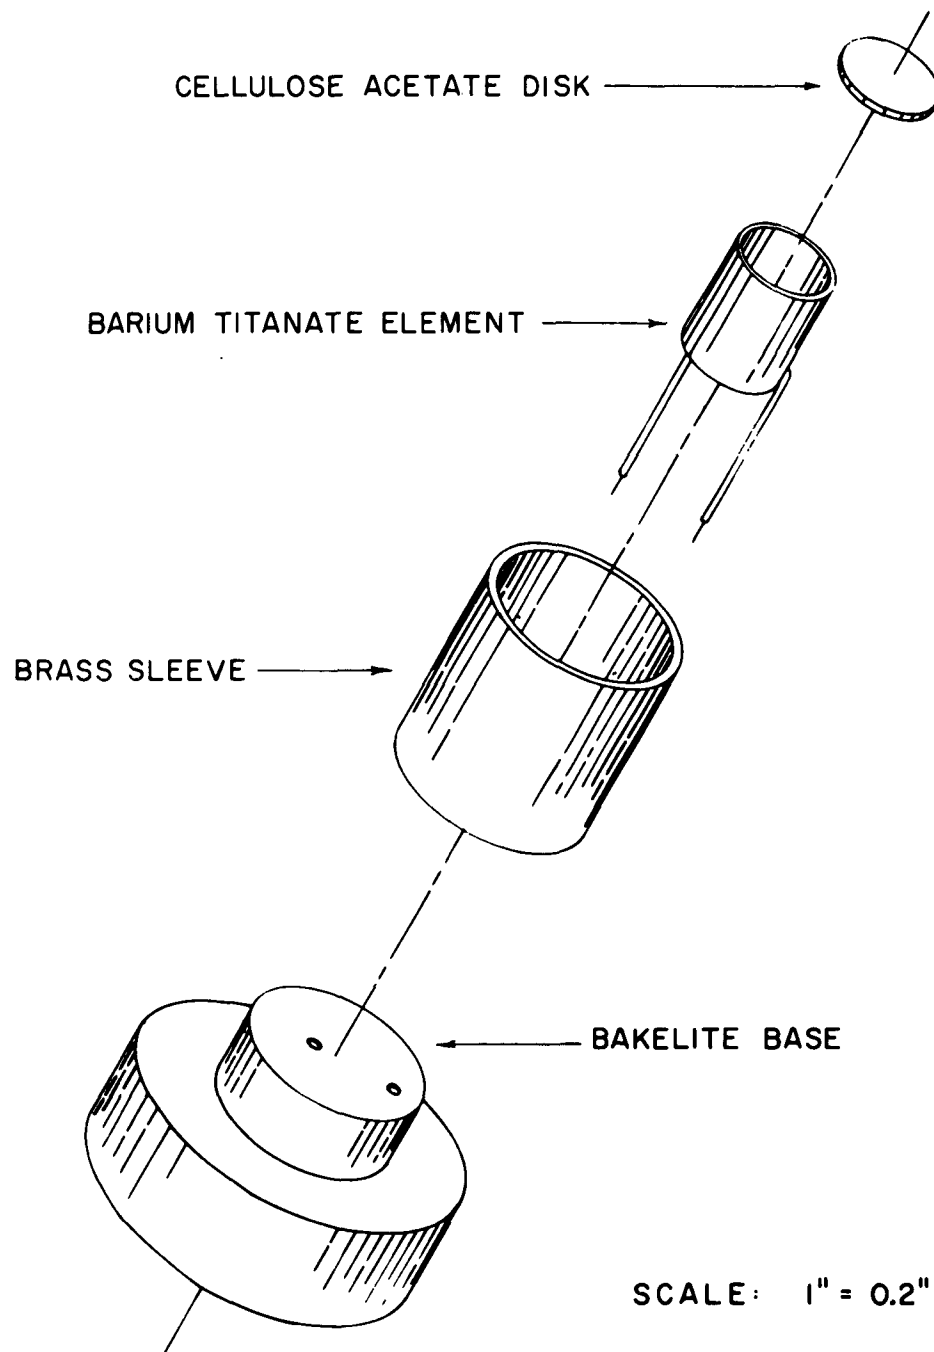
FIGURE I. EXPLODED VIEW OF ESSENTIAL ELEMENTS OF STRESS GAGE.
